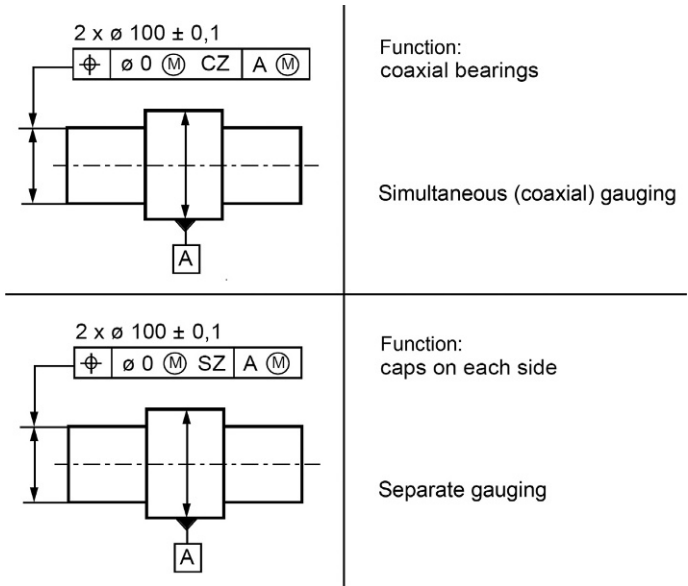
Coaxial shafts related to a datum shaft with (M), a) simultaneous gauging, b) separate gauging
